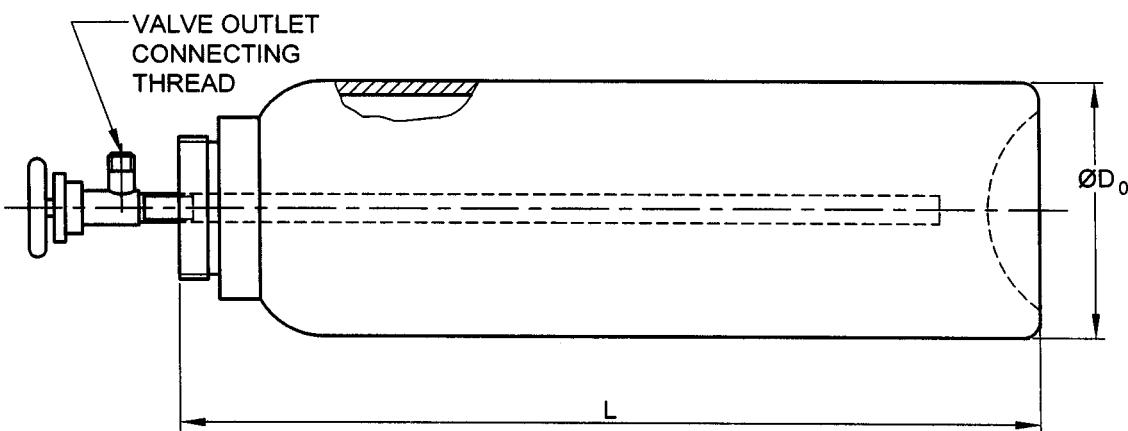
EXTERNAL DIMENSIONS OF STEEL CYLINDER
